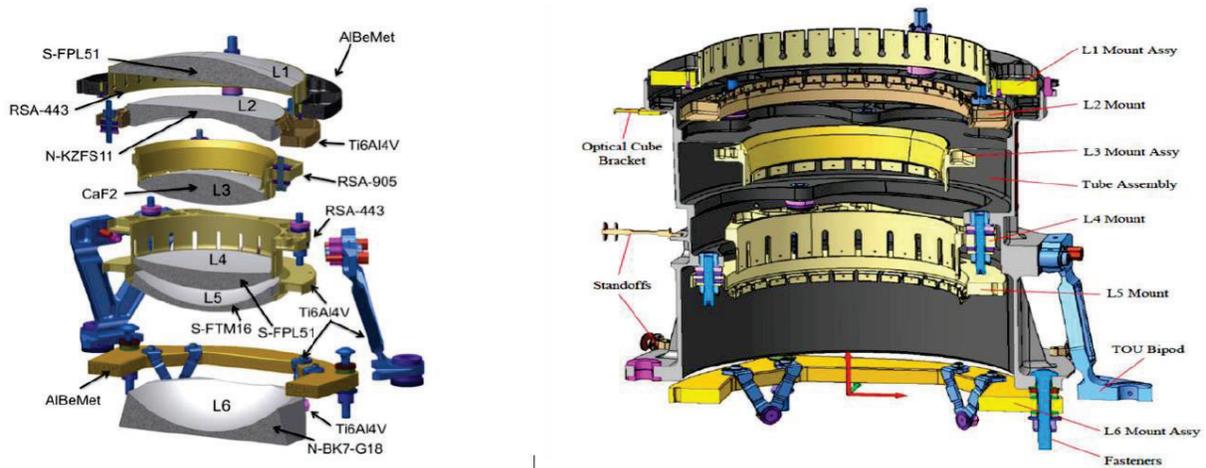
Left: an exploded view of a PLATO's TOU with a focus on the materials used for the glasses, their mounts, and for the interface components. Right: Details of the mechanical structure with subcomponents highlighted.
